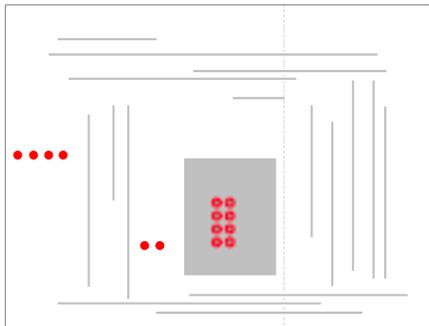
Top layer layout. Maximum number of VIAs from top layer exposed pad to inner layer.
